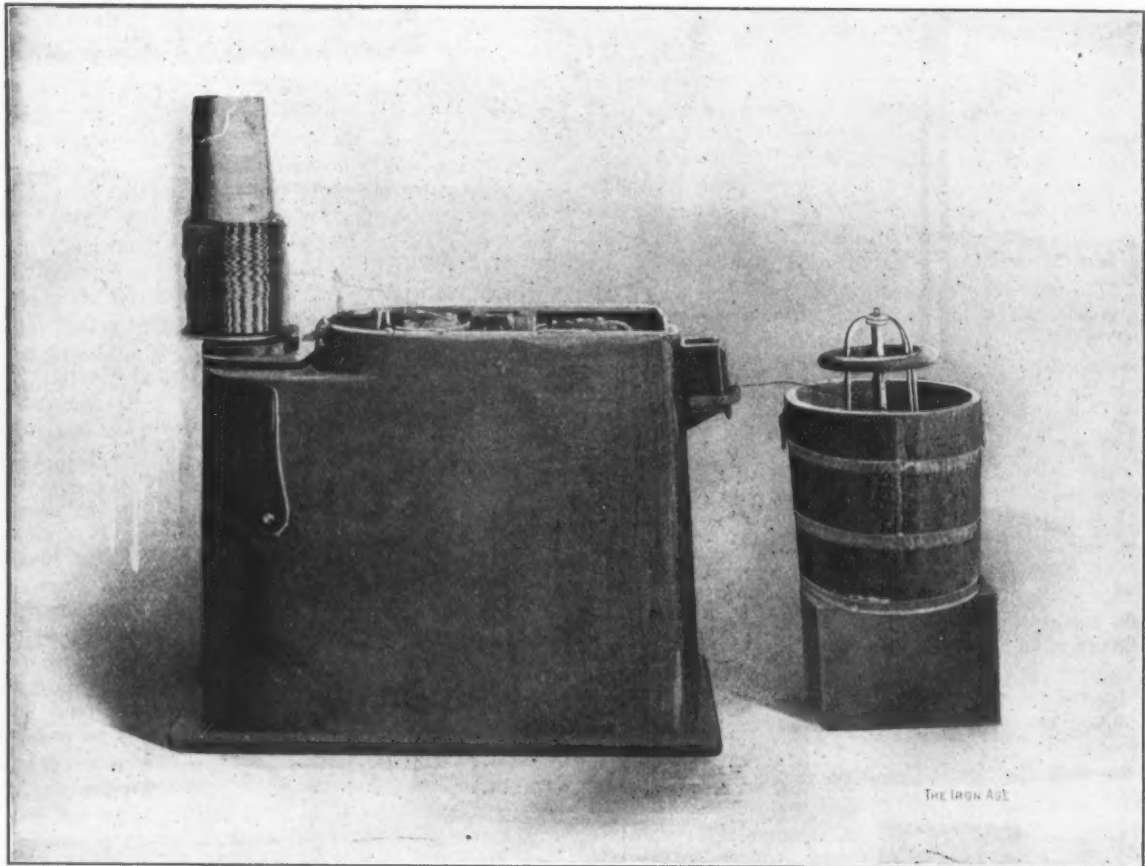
The No. 5 Multiple Die Machine for Wet Drawing from No. 20 Wire to the Finest Sizes, the Finishing Drum Being 8 In. in Diameter and Running at a Speed of 250 Rev. Per Min.—The Base of This Machine Is a Tank Containing the Special Liquor Used for Lubricating the Wire While Being Drawn.
